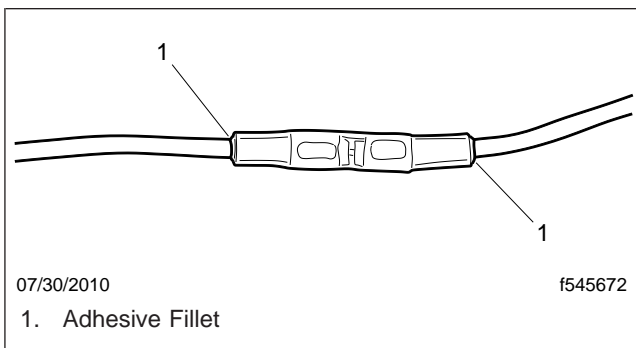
, Heated Solder Sleeve with Solder Band Melted into the Splice
